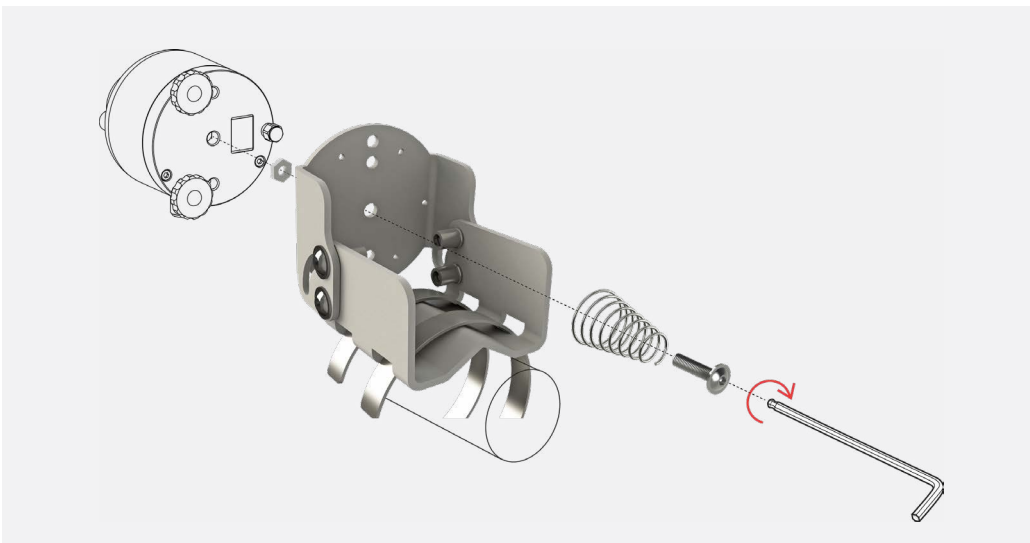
Installation of PMF01 on a horizontal crossarm, step 3a.
